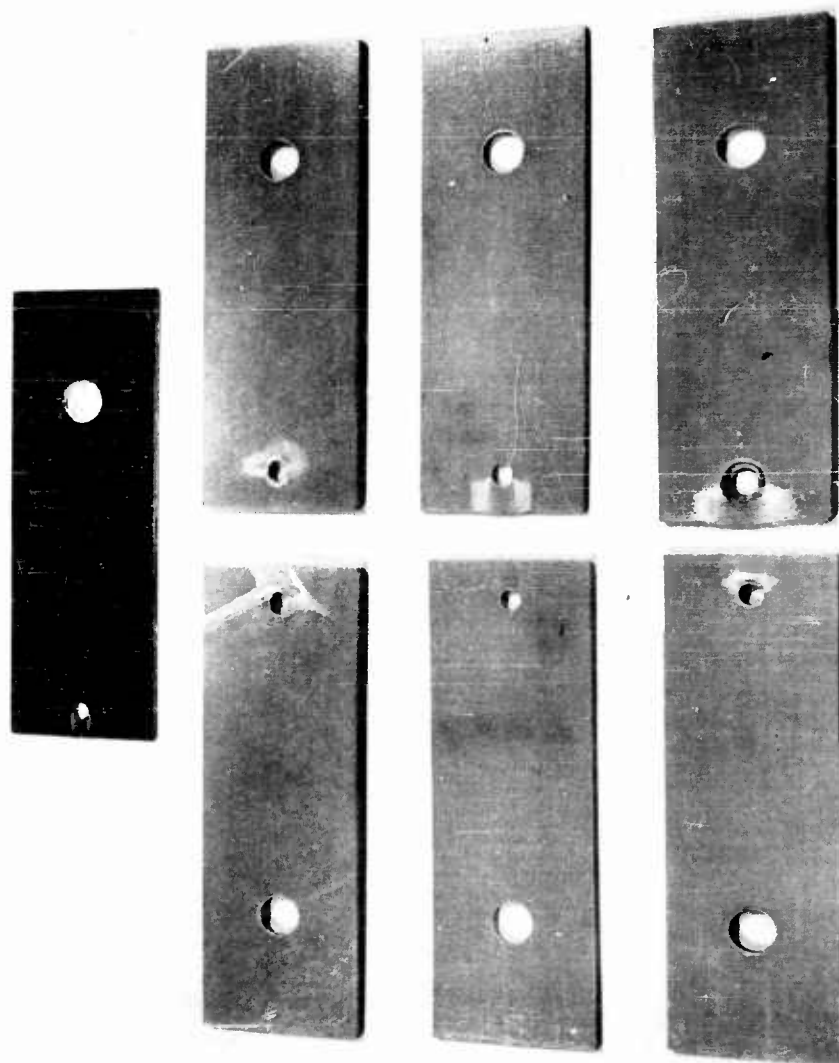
TYPICAL SHEAR TEAR-OUT FAILURES
